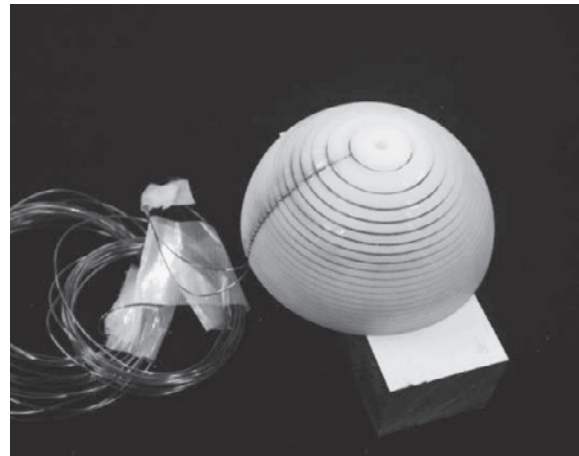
Spherical coil bobbin used to wind a hemispherical coil
